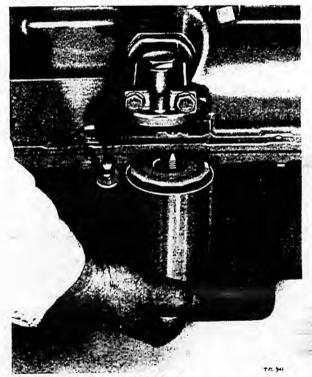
DISMANTLING MAIN OIL FILTER ASSEMBLY
